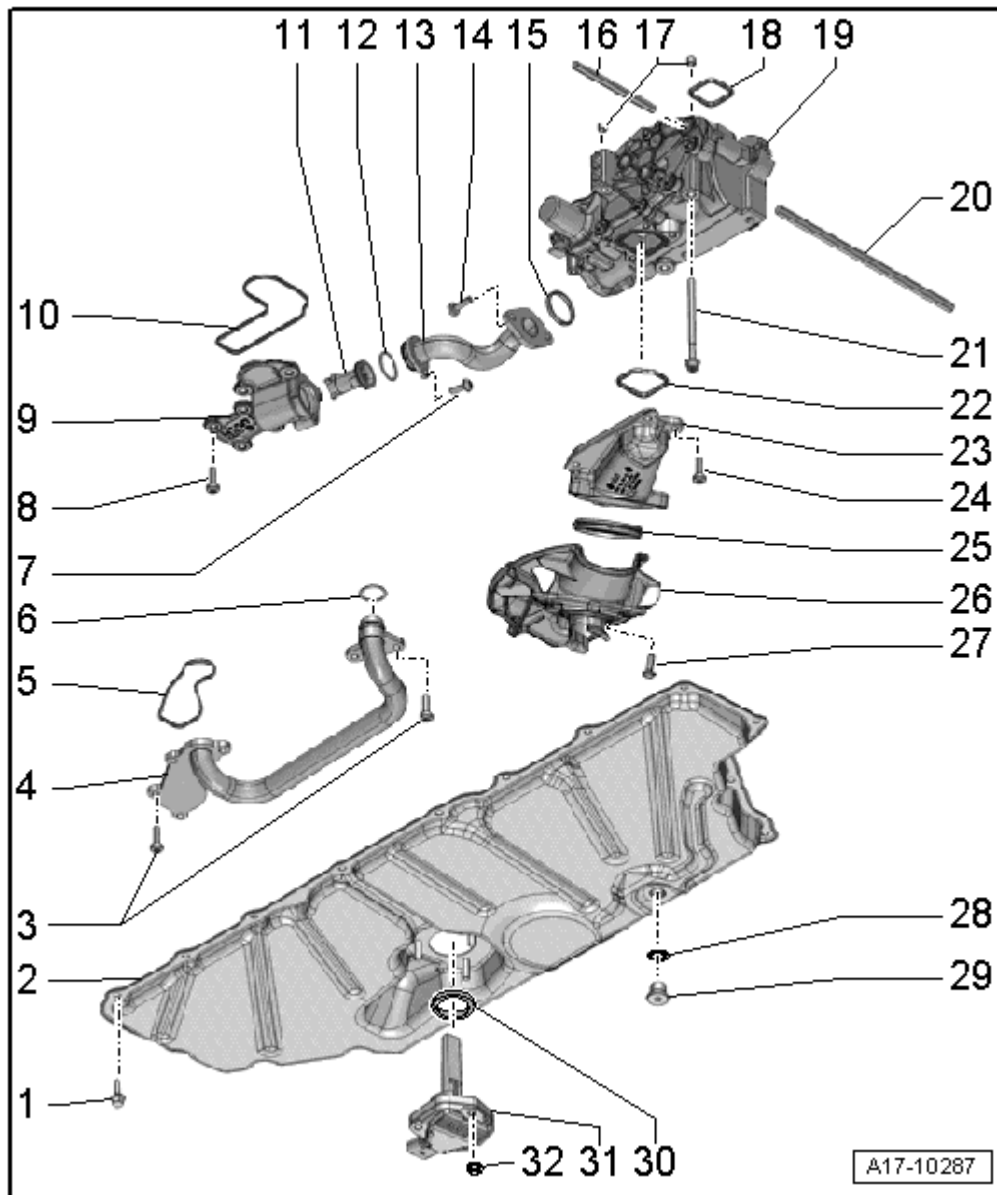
Identifying Oil Pump And Lower Oil Pan Overview
